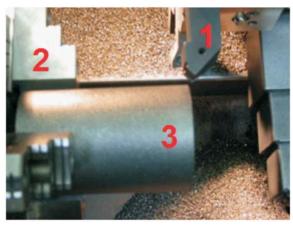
Machining system: 1 - tool-holder, 2 - chuck, 3 - workpiece Slika 5. Obradni sustav: 1 - držač alata, 2 - glava, 3 - izradak
